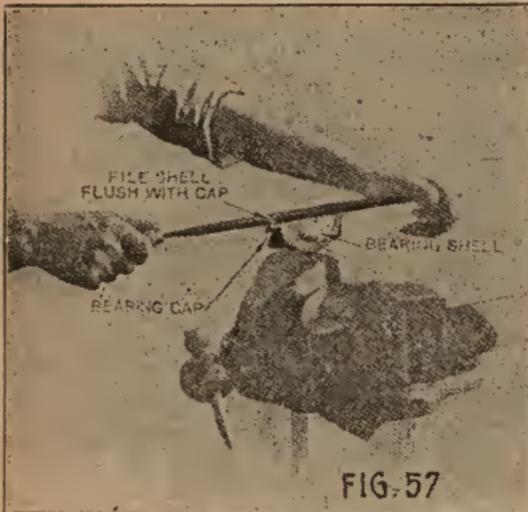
Method of adjusting bearing by filing off cap slightly.
